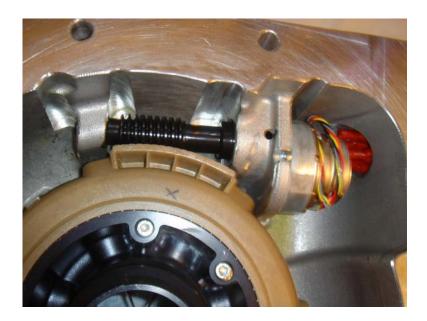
The Motor with worm gear attached and housing in the compressor's body. The housing has small teeth on the outside, which collates with the worm gear.
